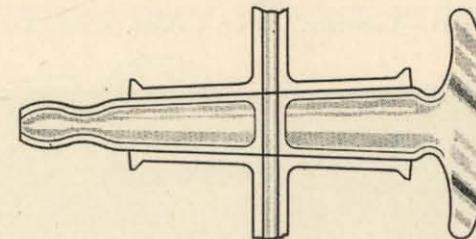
CONSTRUCTION OF A TAIL STOPCOCK
